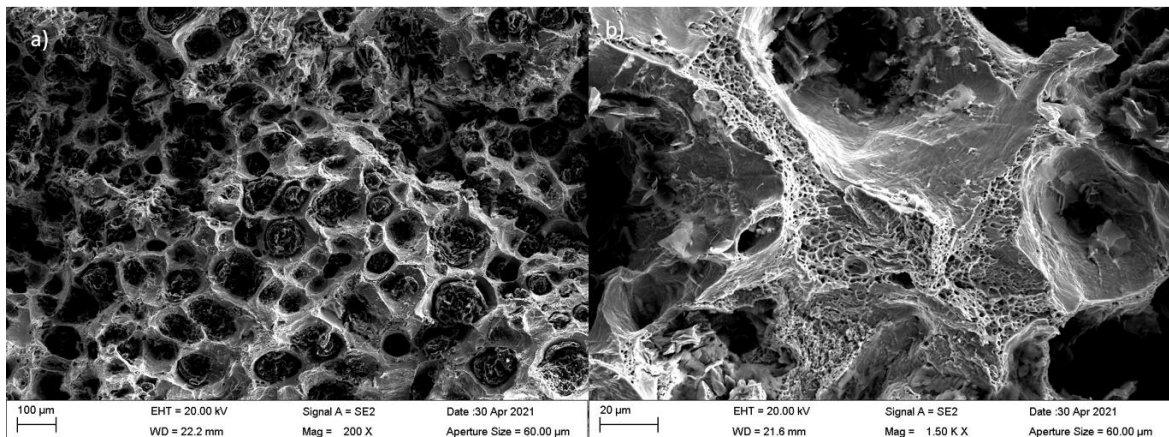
Specimen 5 fracture surface. a) General view showing unusual features (casting defects) and impurities b) showing closeup of the same location.
